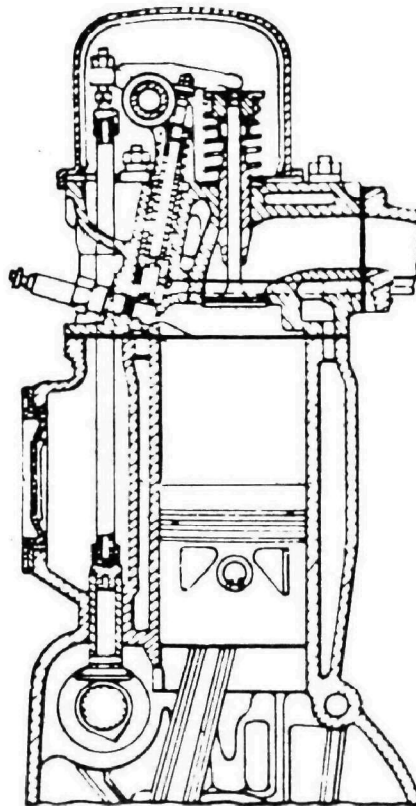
Gussak carburetor-type prechamber engine (Ref. 4-65)
